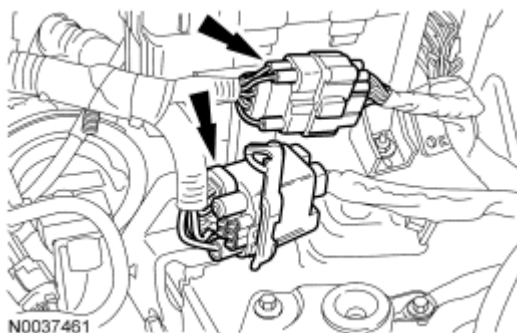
Locating Engine Wiring Harness Electrical Connectors
